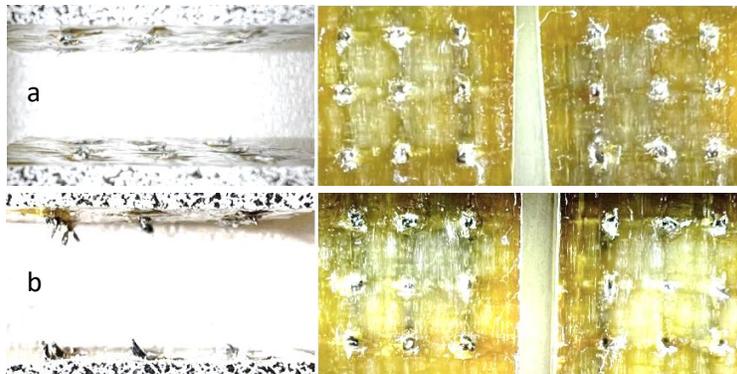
Fracture surface of the specimen tested by a) Compression test setup with lateral guides, b) Tensile test setup.
